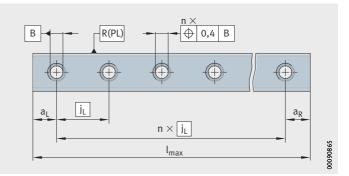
Positional and length tolerances of guideway TKVD14 with one row of holes
